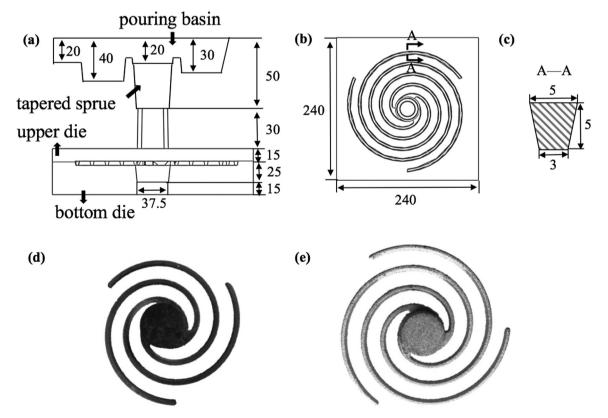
The illustration of the equipment showing (a) front view of the mould, (b) top view of the bottom die, (c) cross-section of the spiral, (d) the fluidity specimen of the Mg-4.2Zn-1.7RE-0.8Zr alloy and (e) the fluidity specimen of the Mg-4.2Zn-1.7RE-0.8Zr-0.2Ca-0.2 Sr alloy. (all dimensions are in mm).
